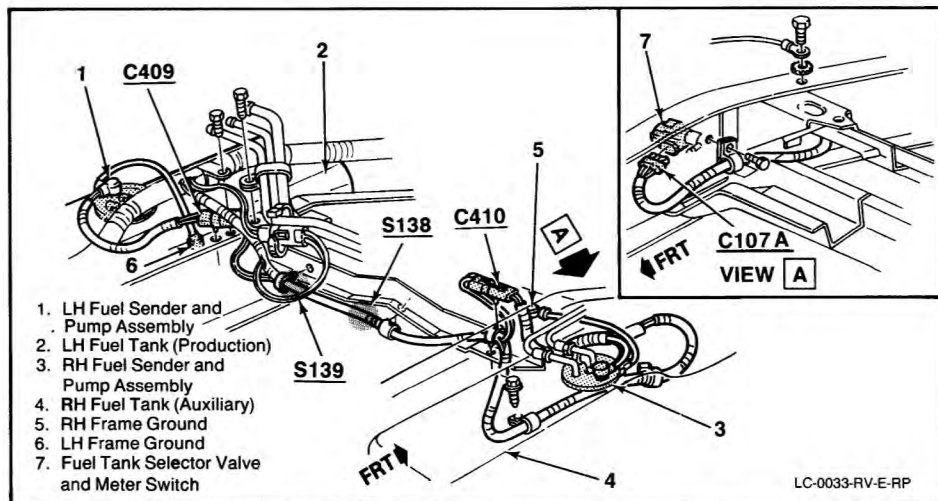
Auxiliary Fuel Tanks — Gasoline
